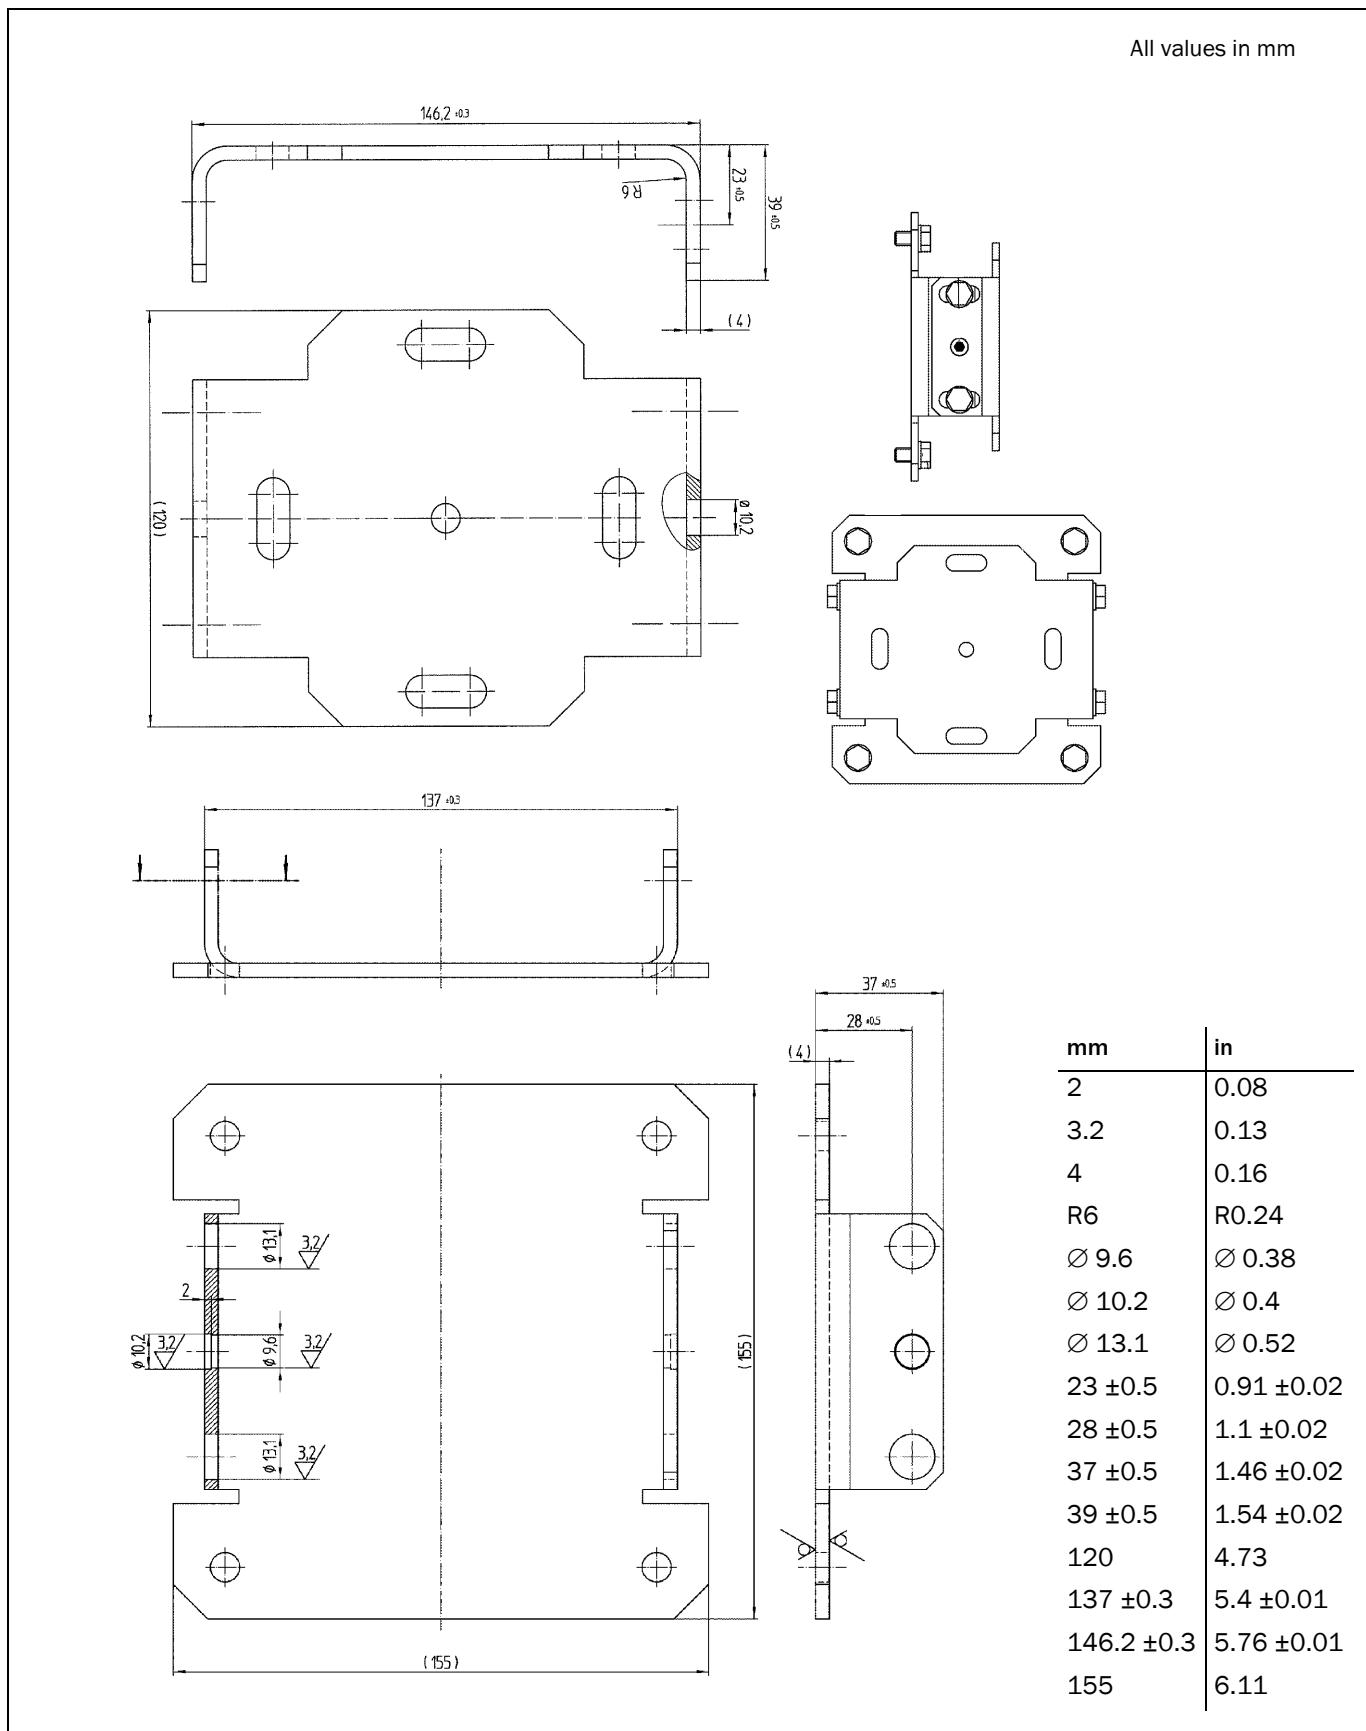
Dimensional drawing bracket for LD-LRS 2100, 3100, 4100 and 5100
